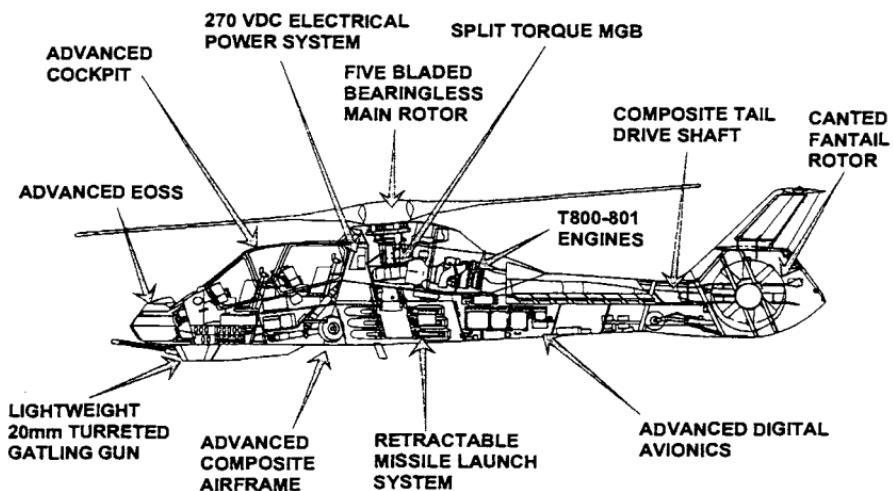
RAH-66A general arrangement, elevation view (Reproduced with permission of the U. S. Army).
